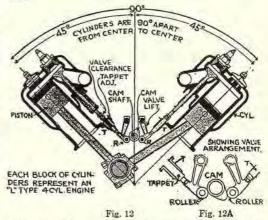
Valve-operating mechanism of the eight cylinder "V"-type engine (Fig. 11).
